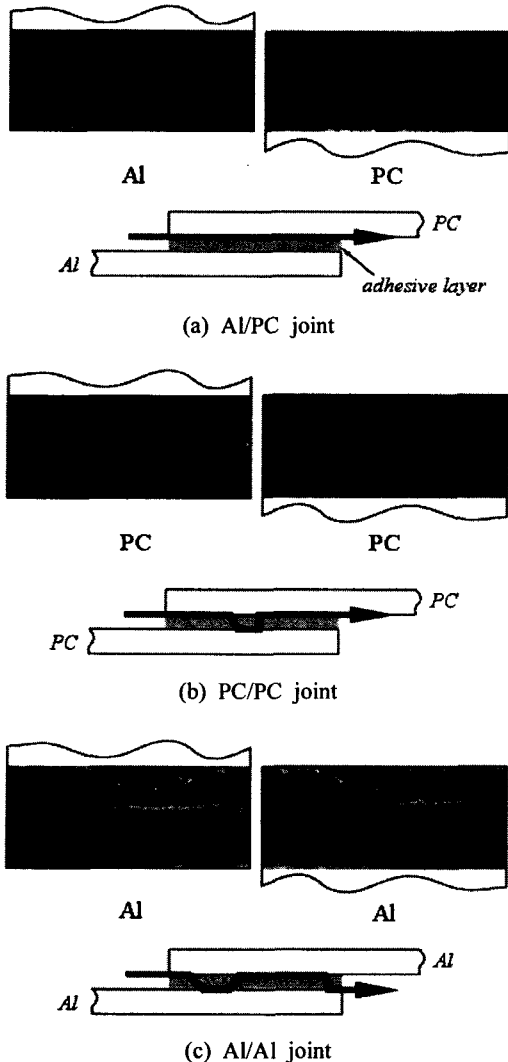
Fracture surfaces of Al/PC, PC/PC and Al/Al joints treated with grinding
